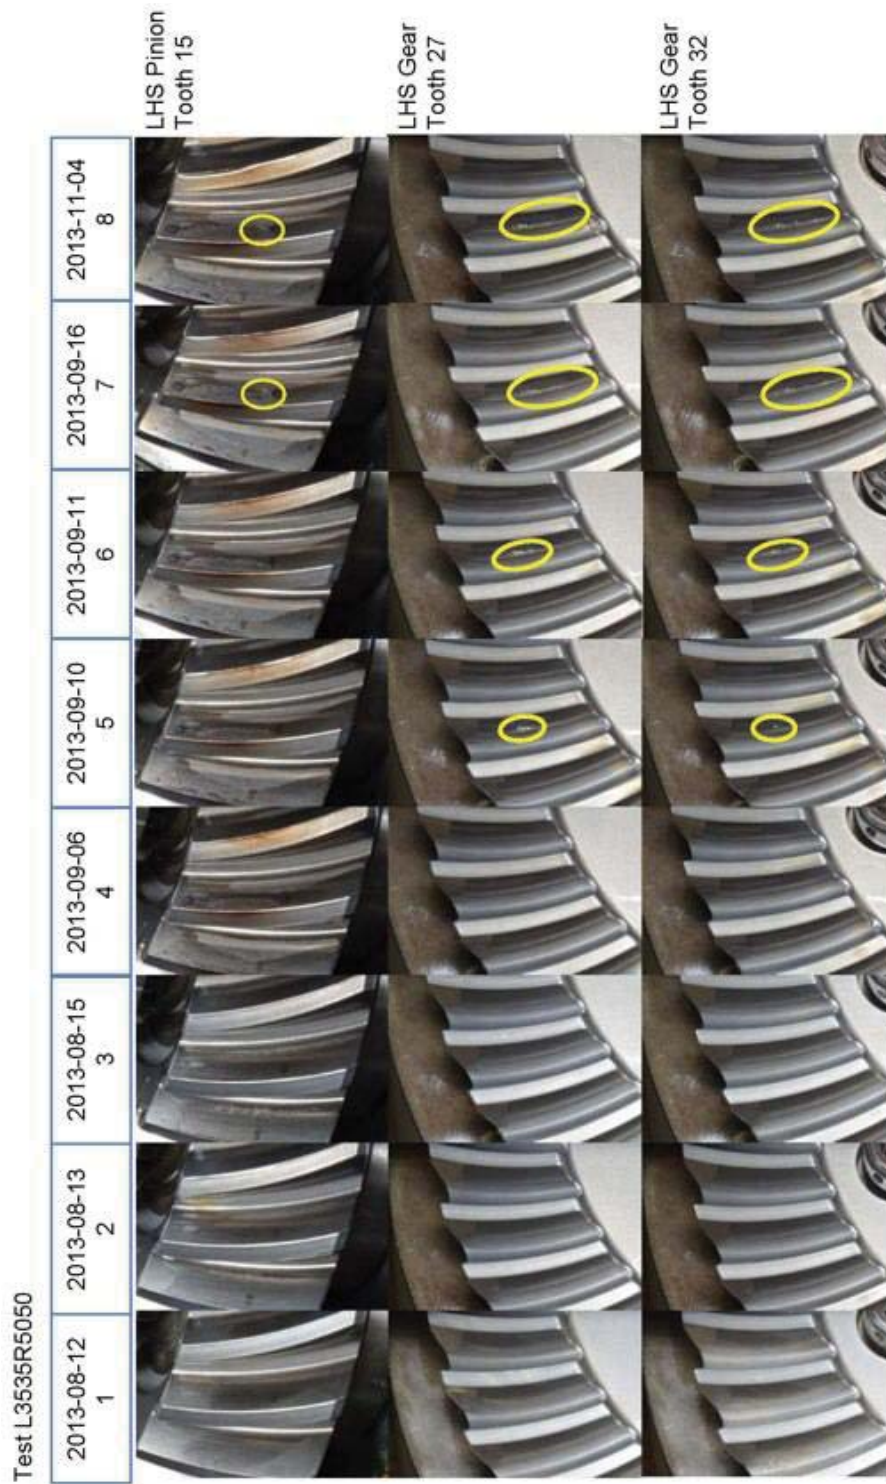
Test L3535R5050 pinion and gear damage modes.
